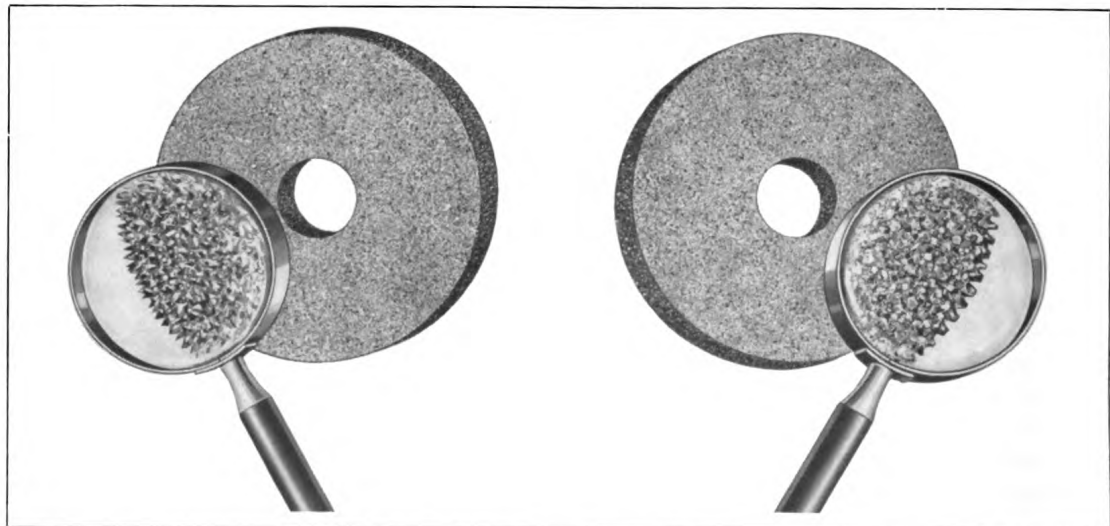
When magnified, the surface of a crush-dressed wheel is seen to consist of a series of sharp points; the surface of a diamond-dressed wheel consists of a series of flat plateaus.
